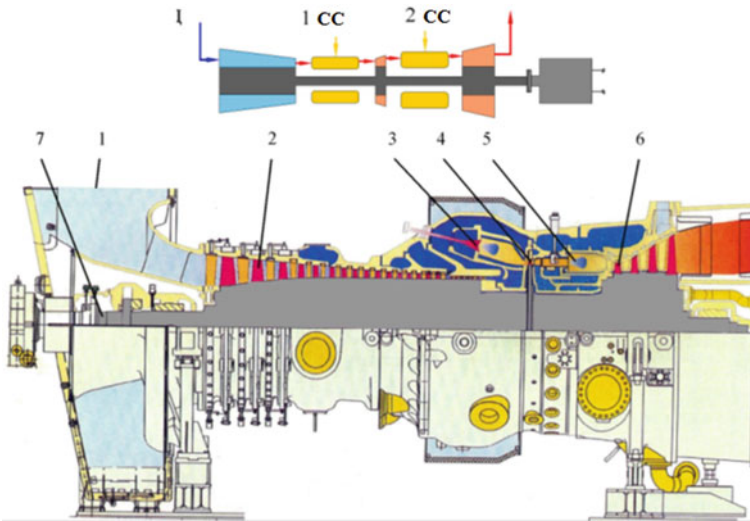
Layout of GT24 and GT26 engines from “Alstom S.A.”. 1—inlet casing; 2—22-stage compressor; 3—combustion chamber; 4—single-stage HPT; 5—additional combustion chamber; 6—4-stage LPT; 7—output shaft
